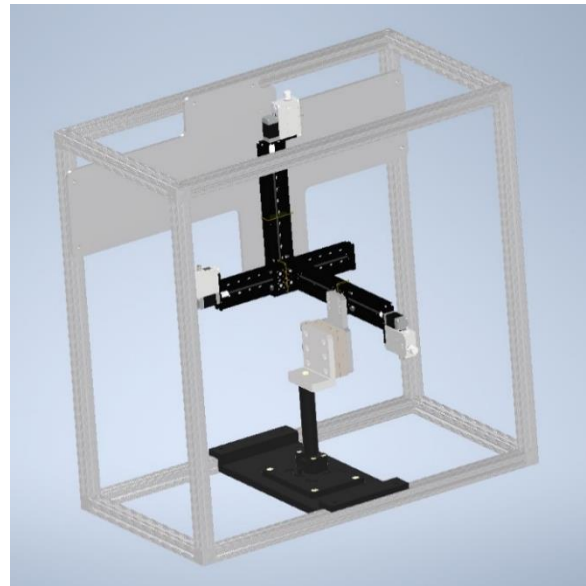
Three axis controller jig CAD rendering. Parts include the three-axis slide rail, custom plastic mounting pieces, collision reduction parts, and framing hardware.
